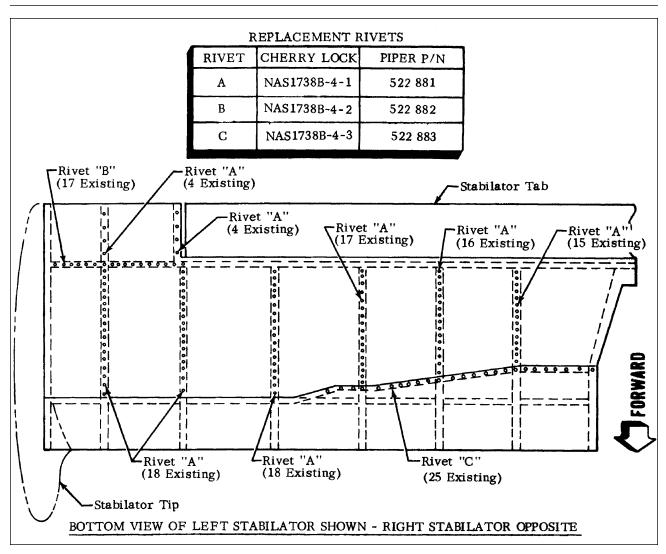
Stabilator Lower Surface Rivets And Rib Attachment
